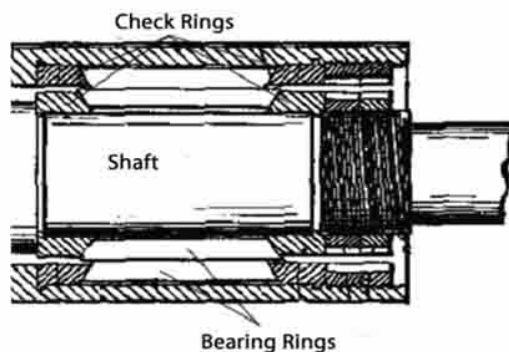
Representation of the bearing rings [20], strutted between the check rings
